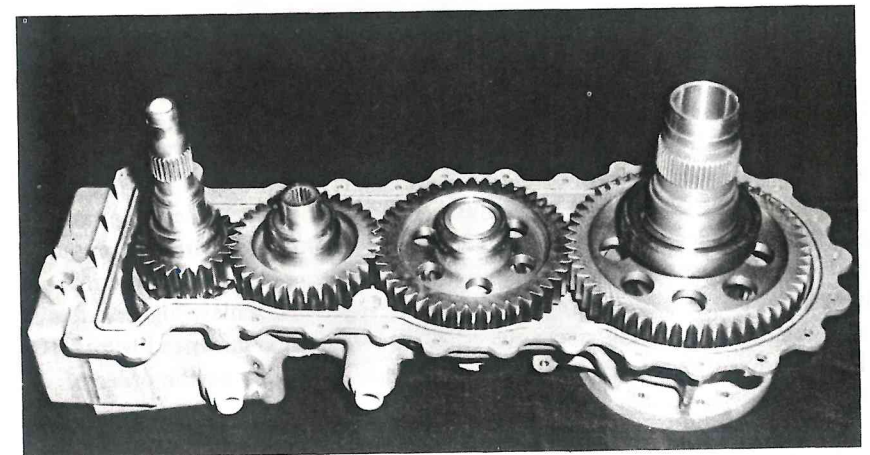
Parallel offset accessory drive gearbox. (Courtesy of American Lohmann Corporation, Hillside, N.J.)
